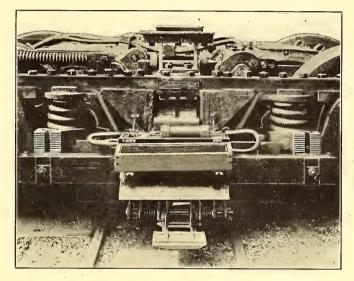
THIRD-RAIL SHOE, FUSE AND CONNECTIONS
